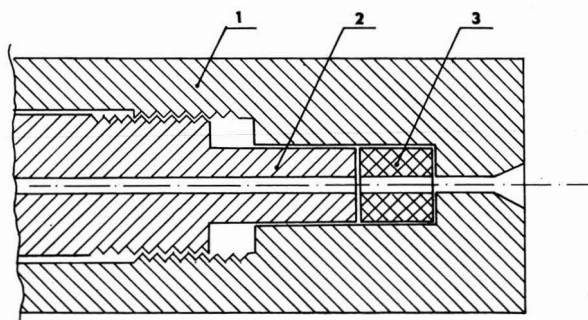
Cross-sectional view of the device. 1 = Perspex body; 2 = elastic (silicone-rubber) insertion; 3 = screw with central bore.
